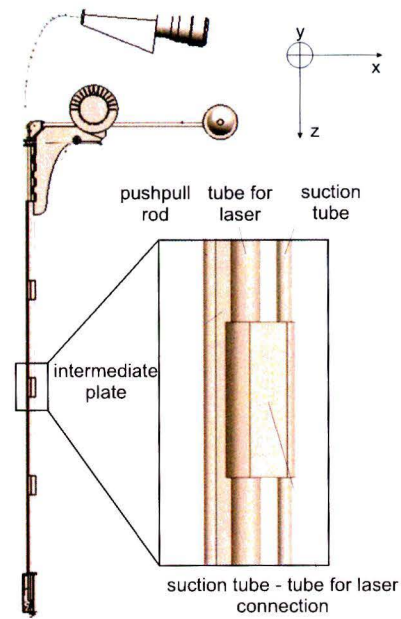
Part of the laser cutting tool that is outside of the laryngoscope.
